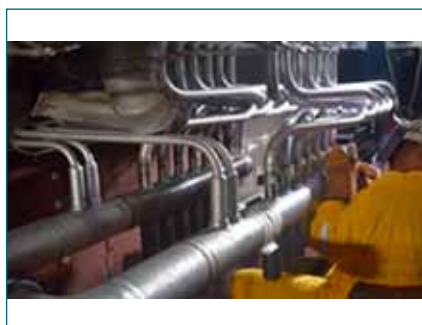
Fit-up and Welding of Water Sub-headers
